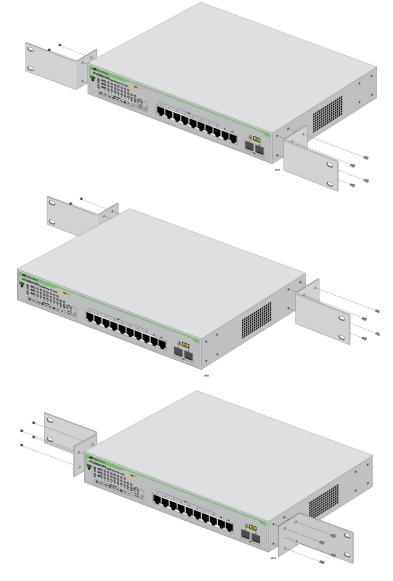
Attaching the Rack-Mount Brackets to the Switch
